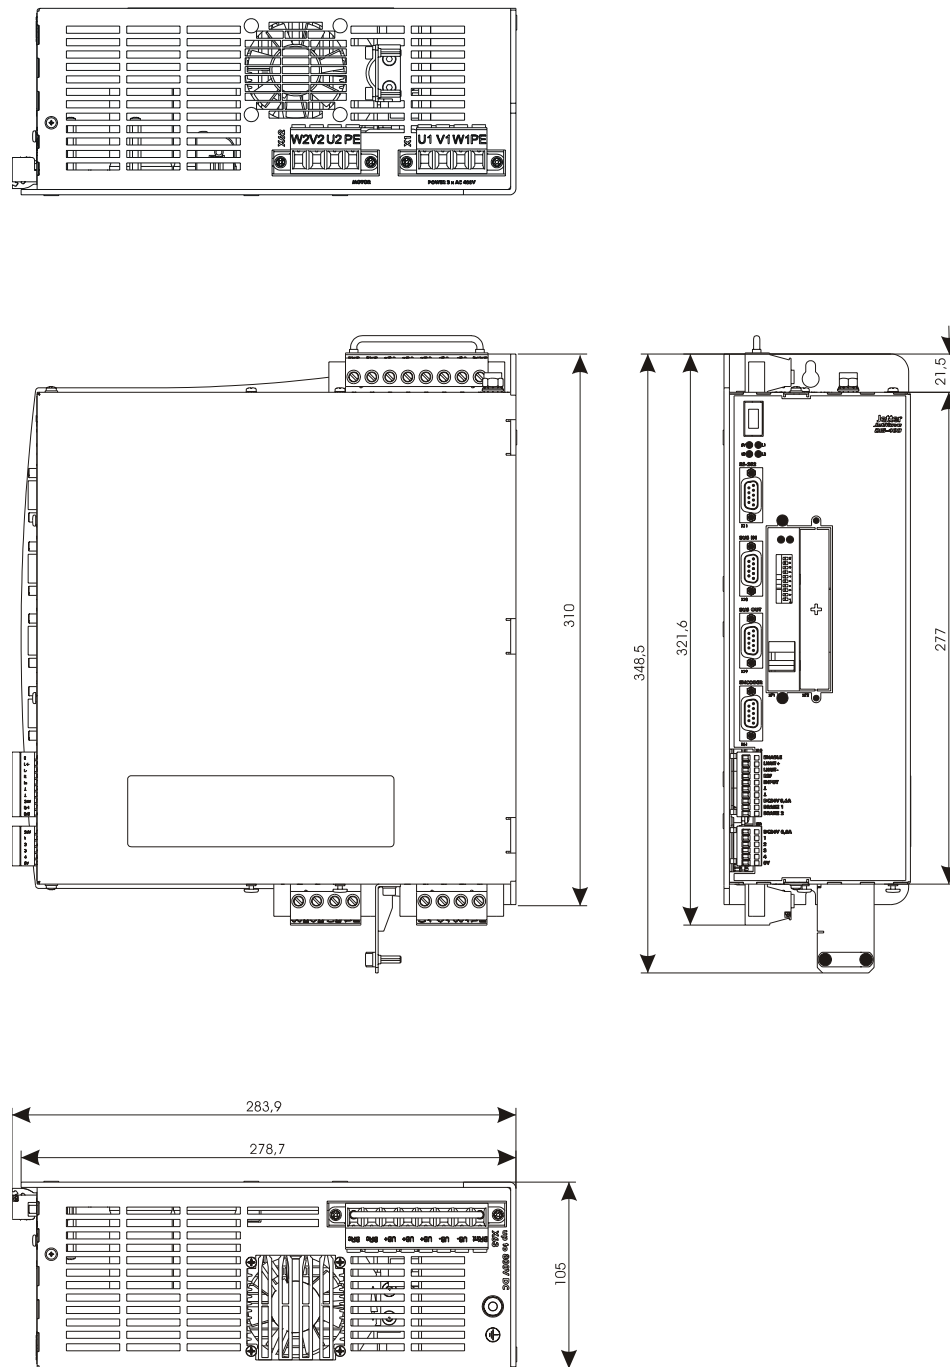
Mounting dimensions of the JetMove 215-480 (in mm)
